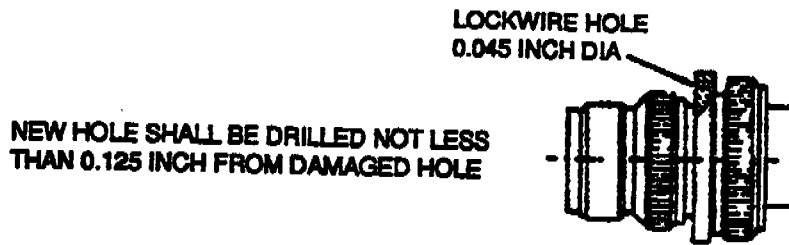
Connector Lockwire Drill Hole - Repair.
